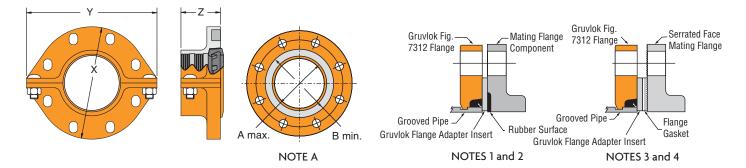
HDPE FLANGE ADAPTER Flange Dimensions Sealing Surface Latch Bolt Mating Flange Bolts Nominal Approx. 0.D. Size Х Ζ A Max. B Min. Qty. Size Qty. Size Wt. Ea. In /mm In./mm In /DN(mm) In /mm In /mm In /mm Lbs./Ka In /mm In /mm In /mm 4.500 9 103% 31/8 4¹/₂ 5³/4 2 5% x 15% 8 5∕8 x 3 15 4 100 114.3 229 114 146 6.8 6.625 111/4 12% 37/8 65/8 73/4 2 5% x 23% 8 3/4 x 31/2 22 6 10.0 150 168.3 314 98 168 197 8.625 13½ 141/8 3½ 85/8 10¼ 2 3/4 x 23/4 8 ³/₄ x 3¹/₂ 26 8 200 219.1 343 378 89 219 260 12.7
